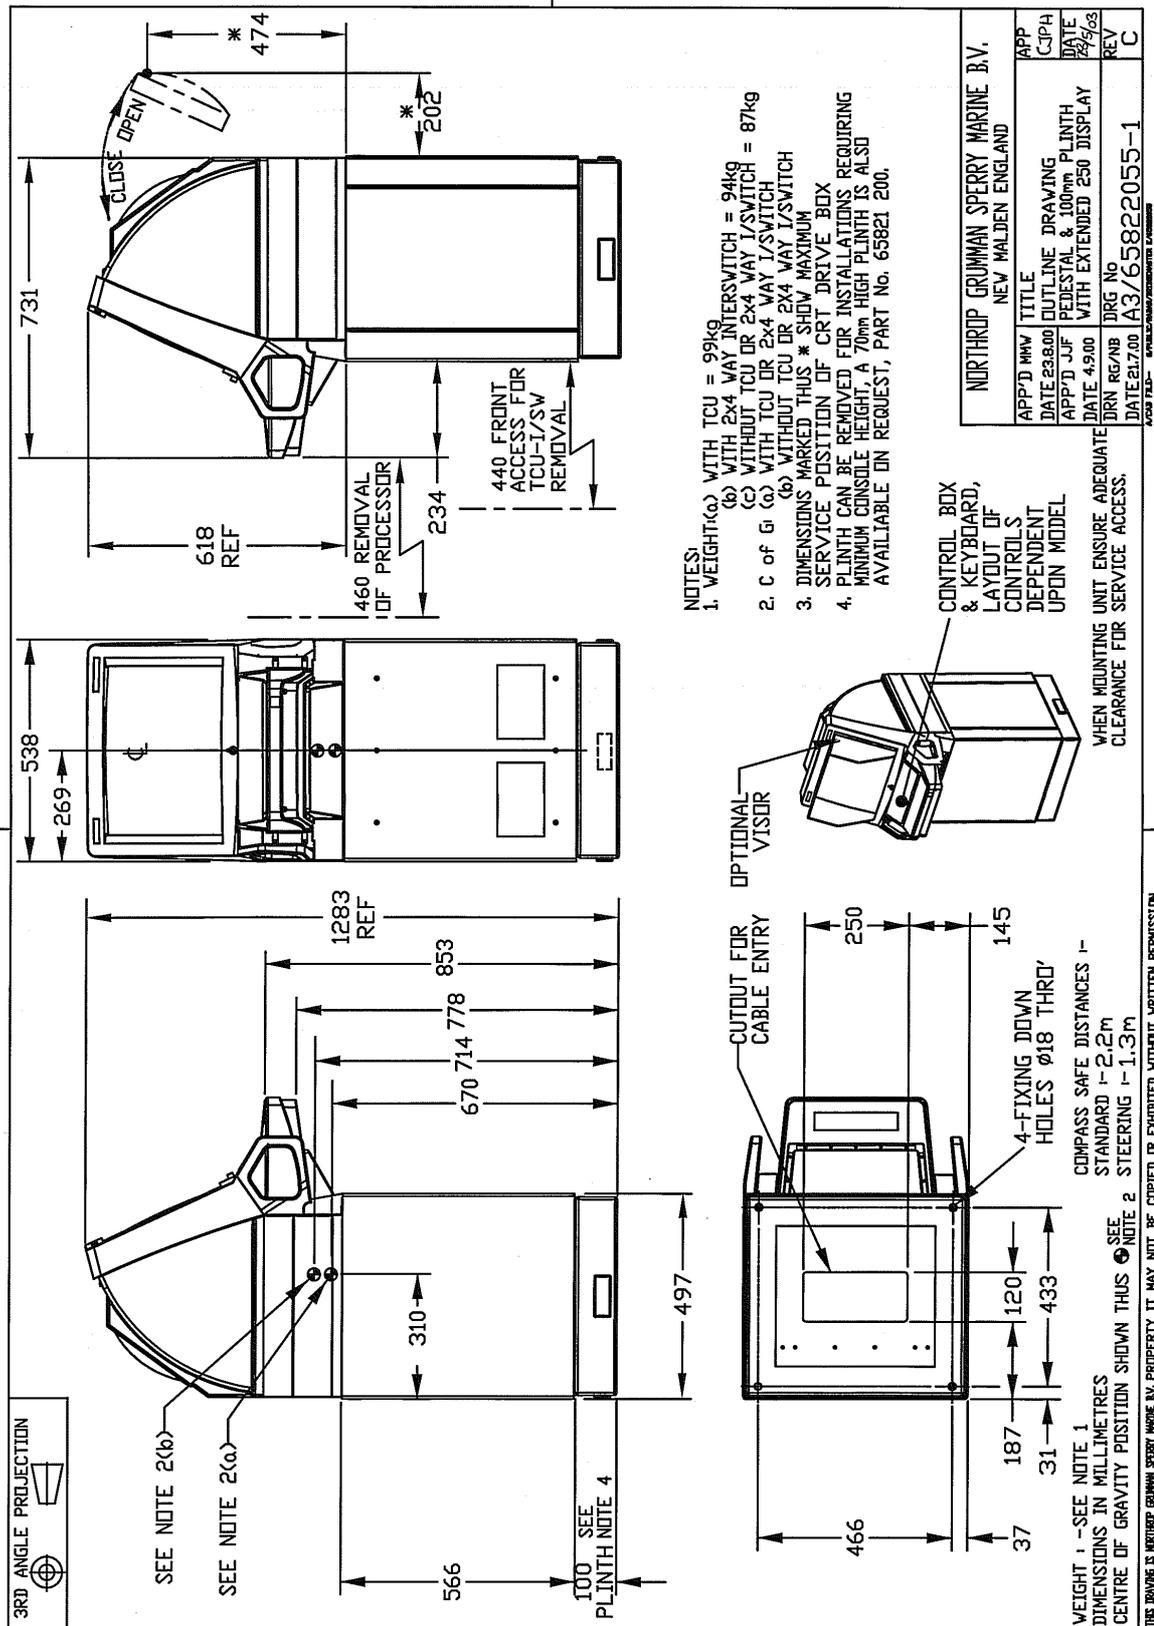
250 Extended Display Unit (CRT with Pedestal) Outline Drawing
